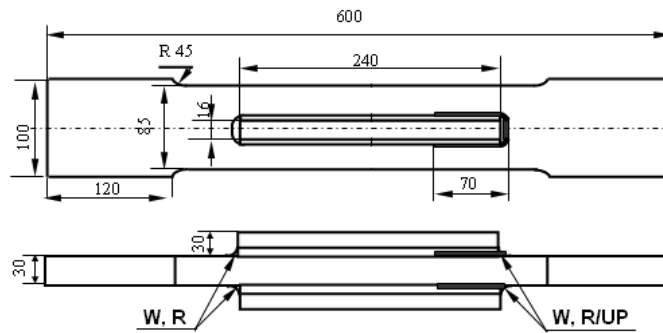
Drawings of welded specimens for fatigue testing at different conditions:
